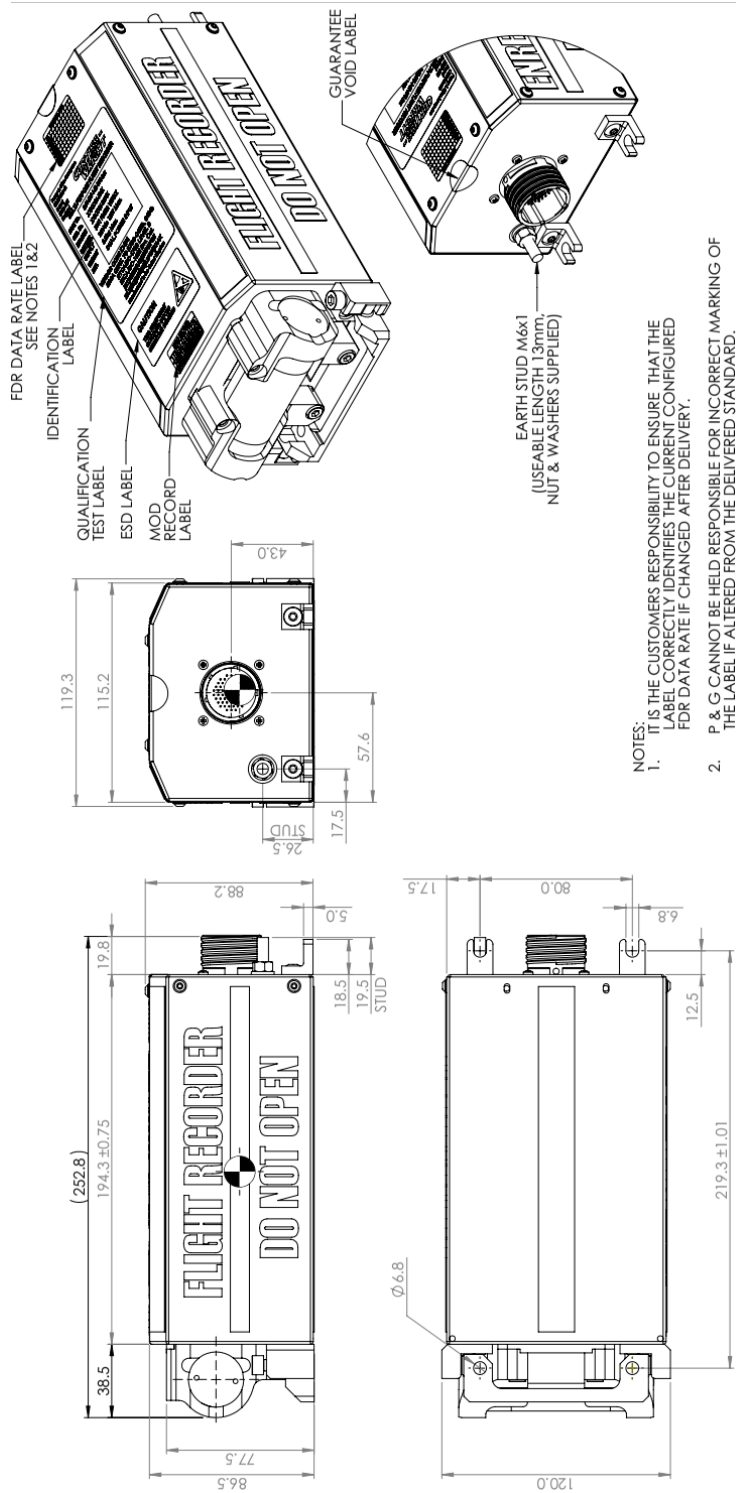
Installation drawing for DIMPFR Type D51615-142-090
